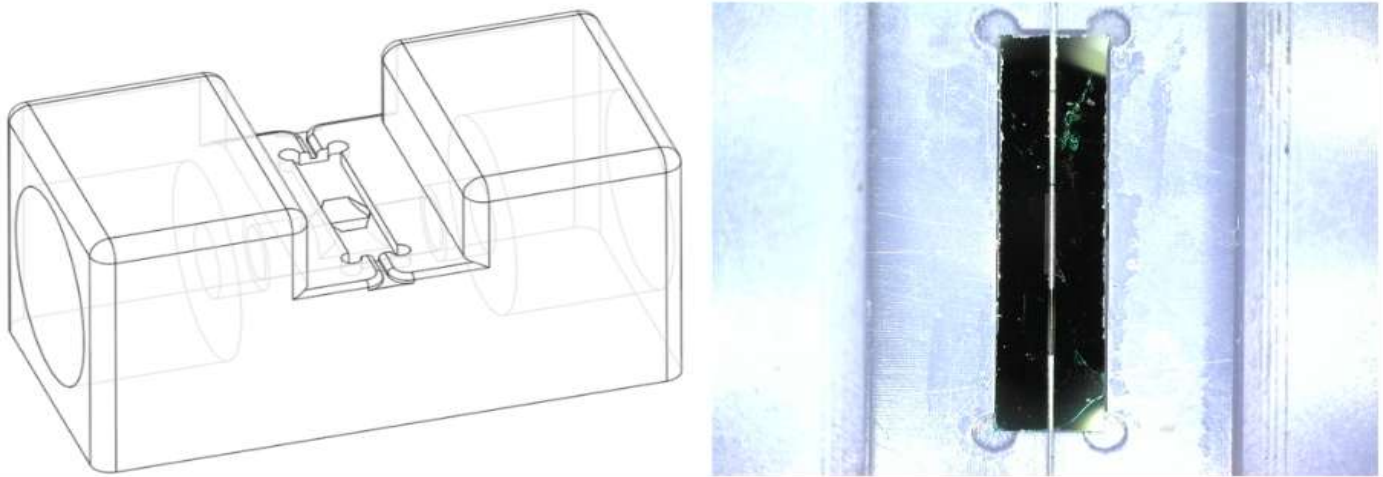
Left: CAD drawing of the chip housing. Right: 3D printed chip housing with an FBG aligned on top of the Si_3N_4 membrane.
